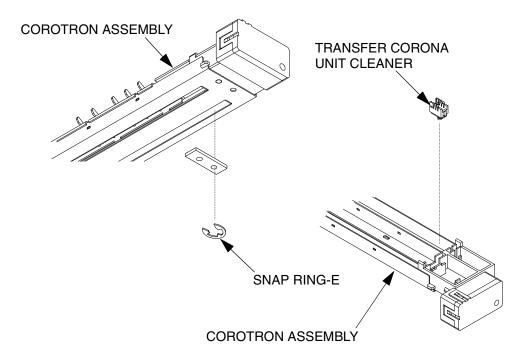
Removal of the Transfer Corona Unit Cleaner
